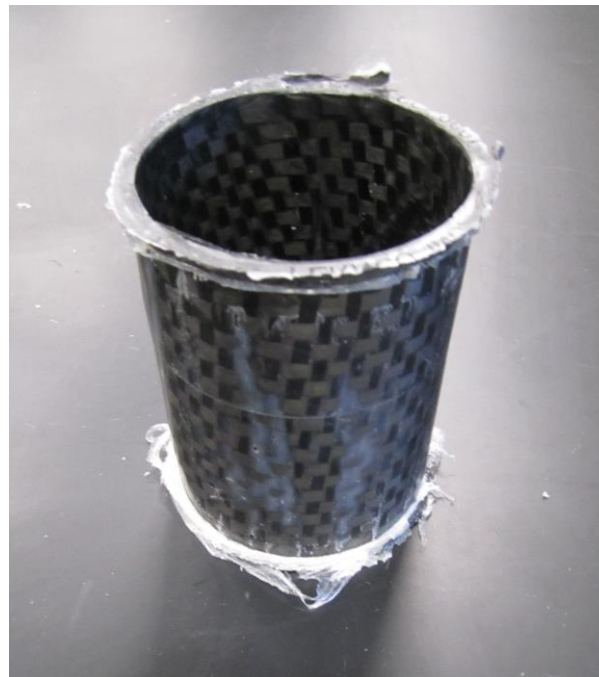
Rough Carbon Fiber Composite Cylinder after Removal from Mold.
